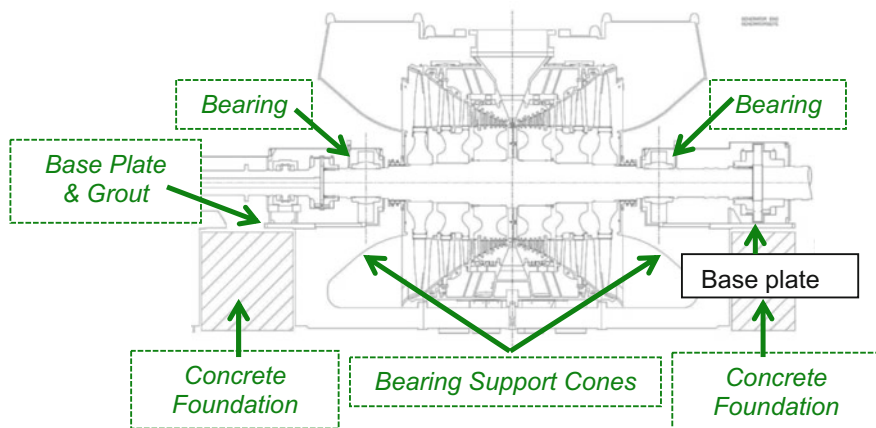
Details of flexible bearing supports an LP turbine (courtesy of Siemens)
